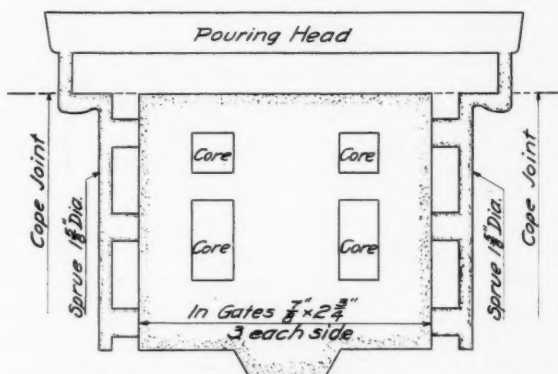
SKETCH SHOWING METHOD OF GATING LOCOMOTIVE CYLINDER CASTING.
